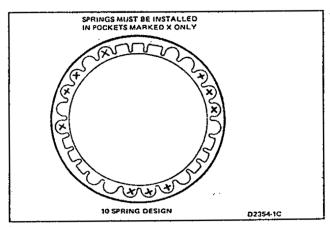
Reverse-High Clutch Piston Return Spring Locations
